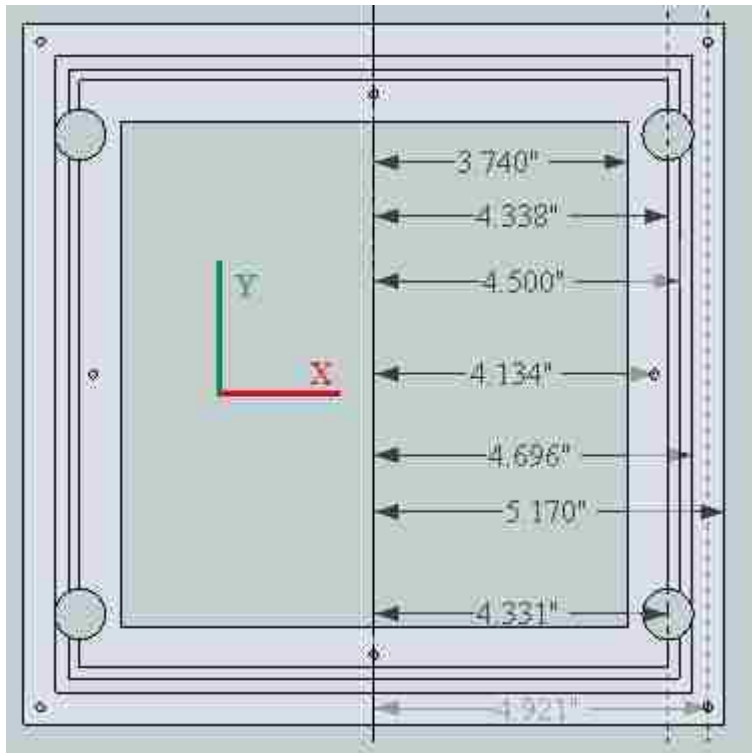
Top view of the 20x20 cm² lower trimmer lead plate illustrating the cross-plane dimensions. The lower trimmer is square, such that all non-hole dimensions are equal in the in-plane and cross-plane dimensions.
